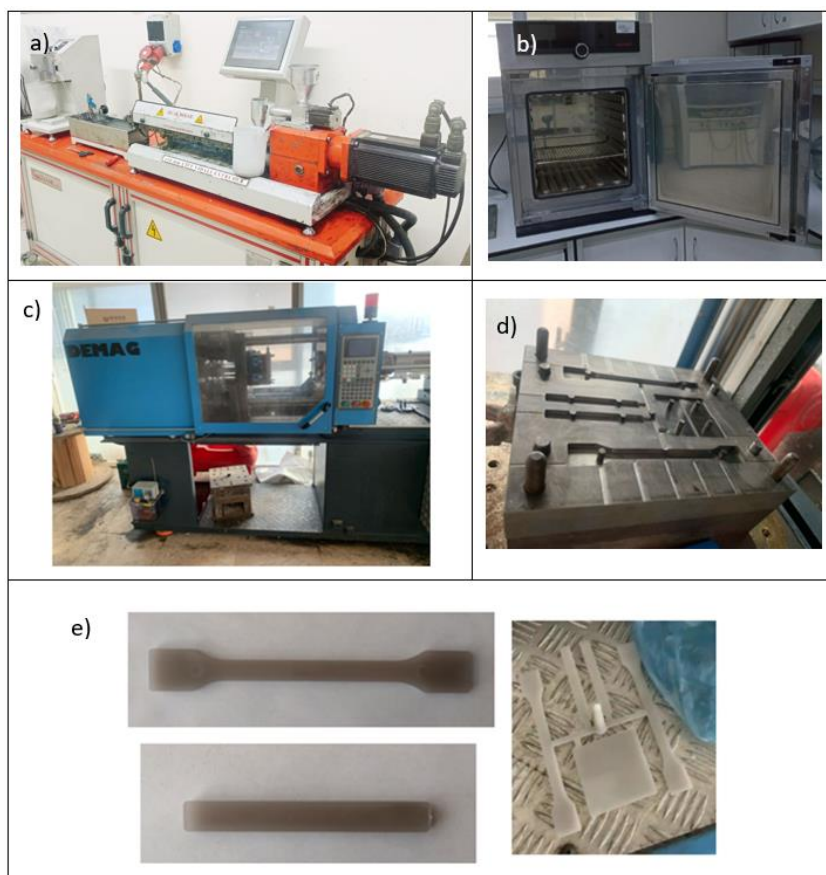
Used in the production of unfilled PP and CB-filled PP composites; a) extruder, b) oven, c) molding machine, d) mold, e) sample
